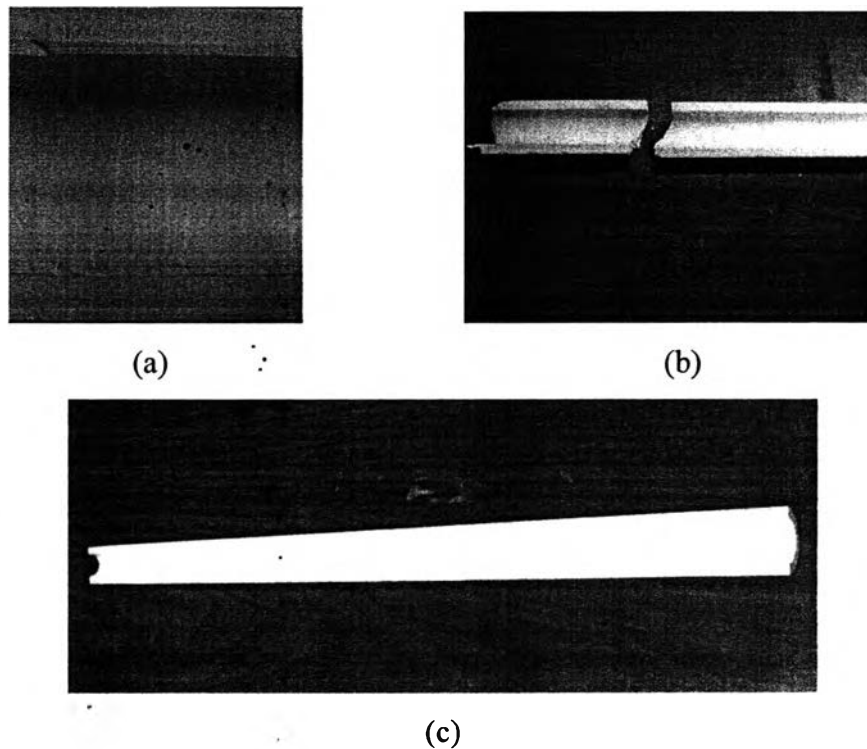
The plaster test section after casting (a) air bubbles or holes on the surface (b) cracking plaster (c) complete plaster.
